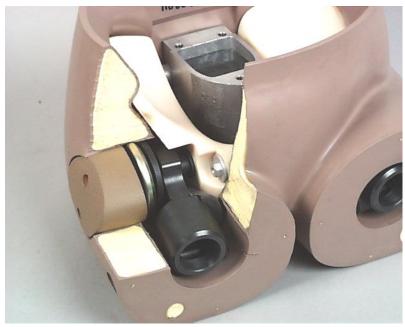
ES-2re Pelvis Partial View Showing Femur Joint Assembly
